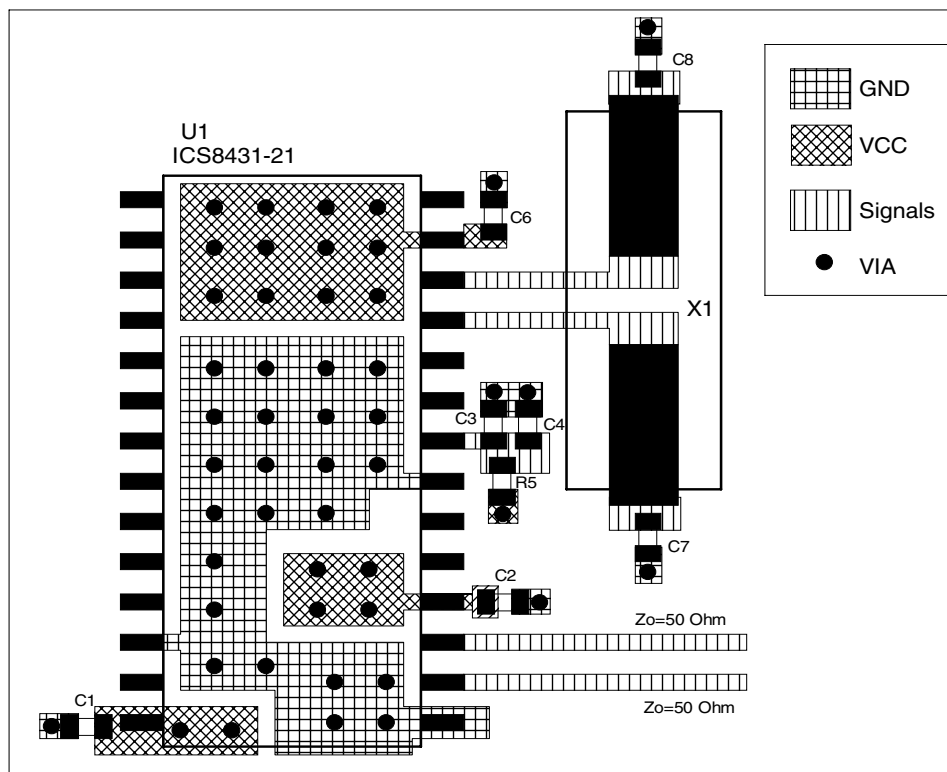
B. PCB BOARD LAYOUT FOR ICS8431I-21
